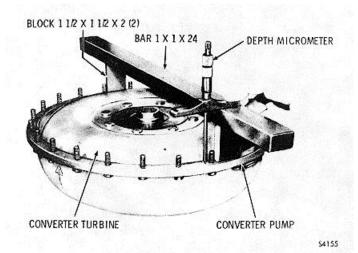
Measuring dimension "C" for selection of converter spacer (AT 543)
